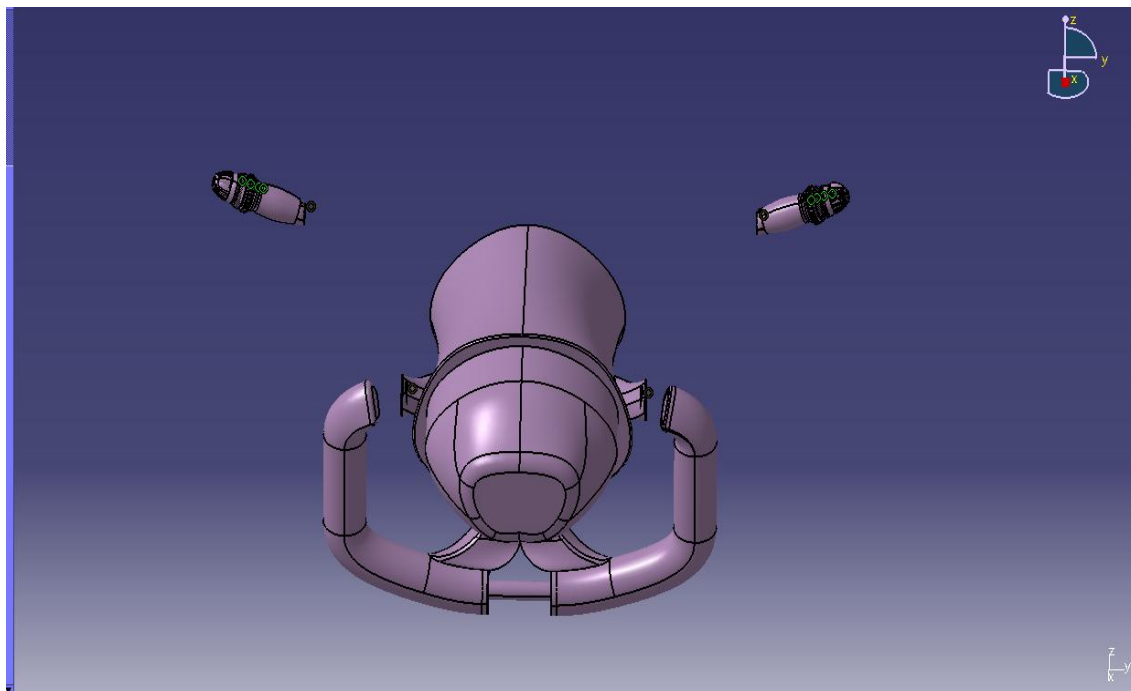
Definition of indicator light lever surfaces where the coincide constraint is imposed.
